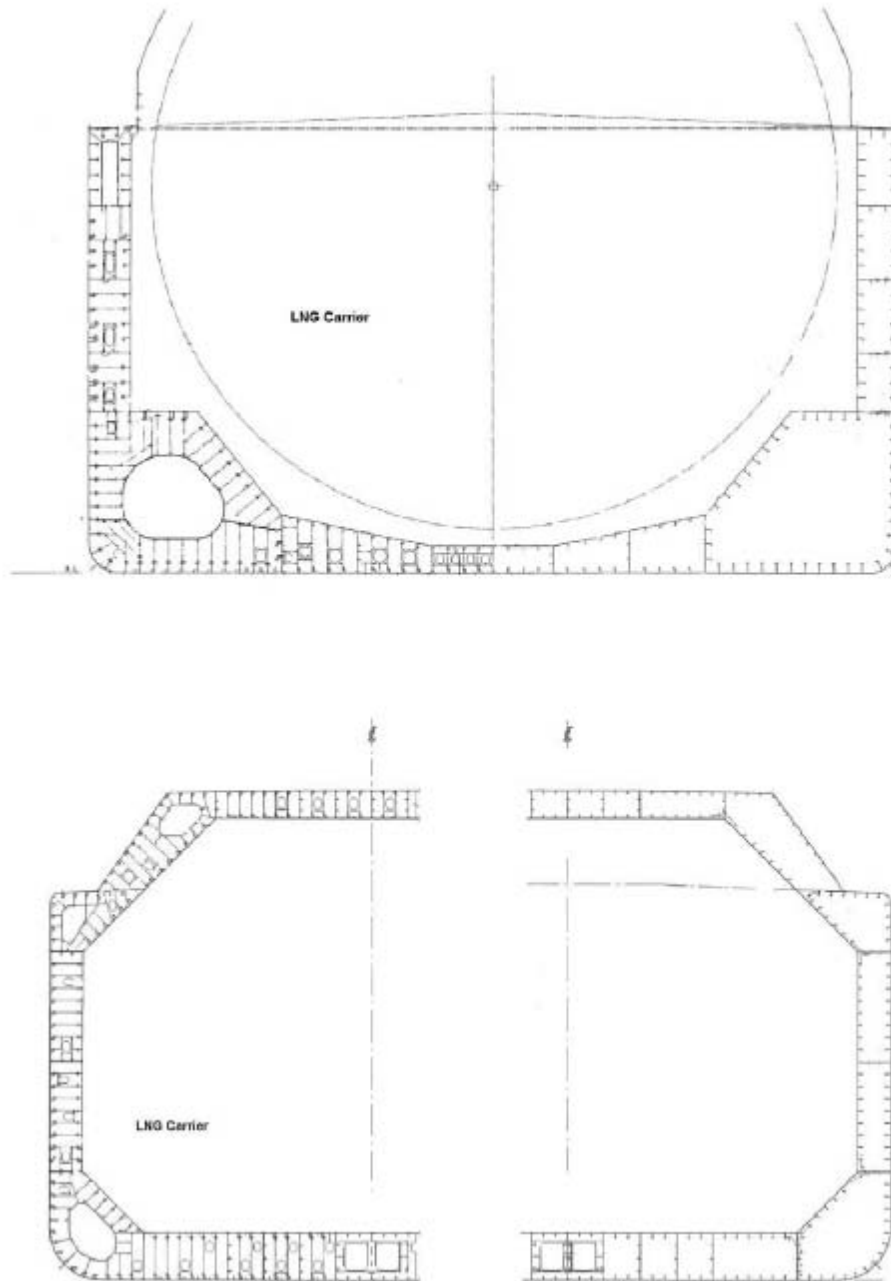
LIQUEFIED GAS CARRIERS TYPICAL TRANSVERSE SECTIONS
